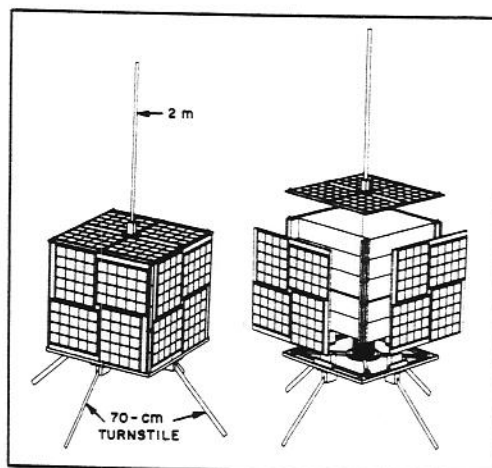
(MSat)—Microsat structure. Exploded view at right. (drawings courtesy WD4FAB)
